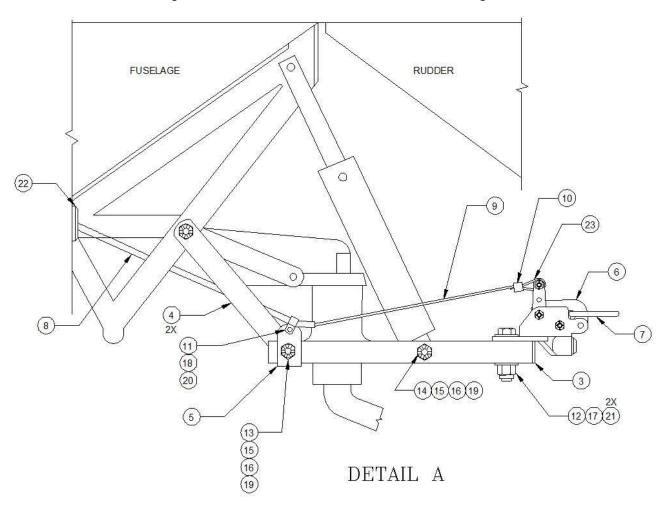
PATH Tow Hook Installation for Boeing A75, Detail A
